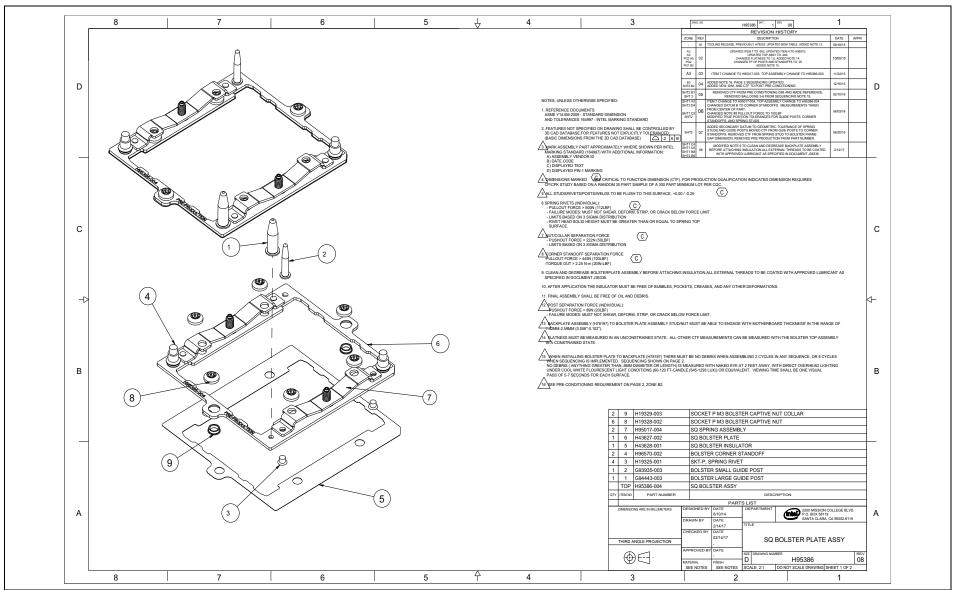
Square Bolster Plate Assembly (Sheet 2 of 2)
